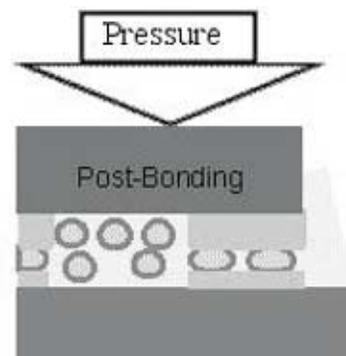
ACF film after assembly, with the conducting spheres locked between the chip and substrate bond pads.
